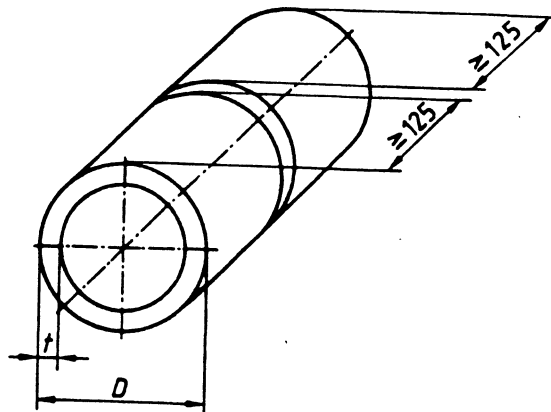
Dimensions of test piece for a butt weld in pipe
